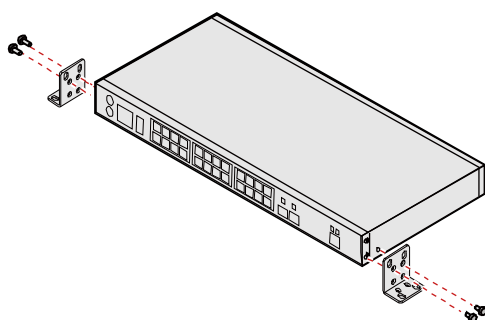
Installing the rack-mounting ears (applicable to an N66 cabinet)
